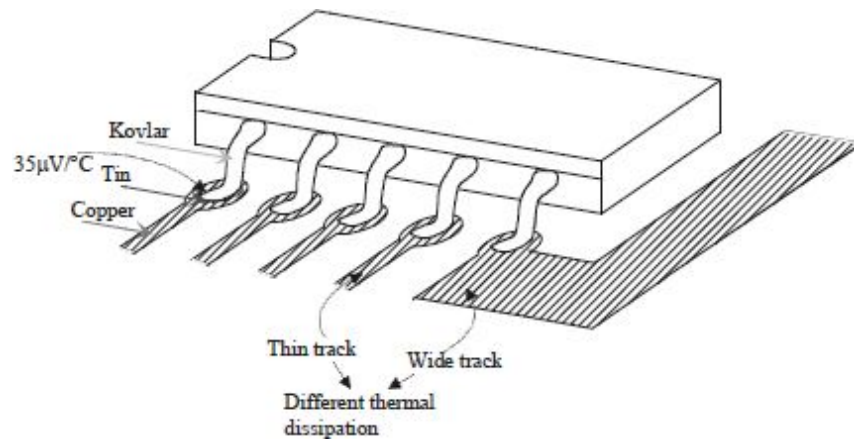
Thermocouple problem due to the IC welds.
